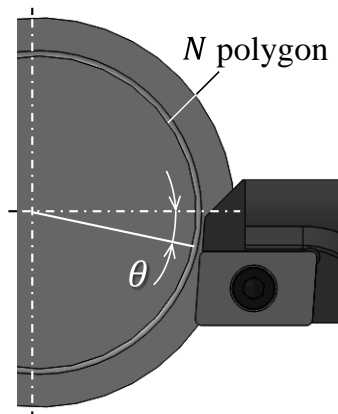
Definition of the workpiece revolution angle per tooth θ .
